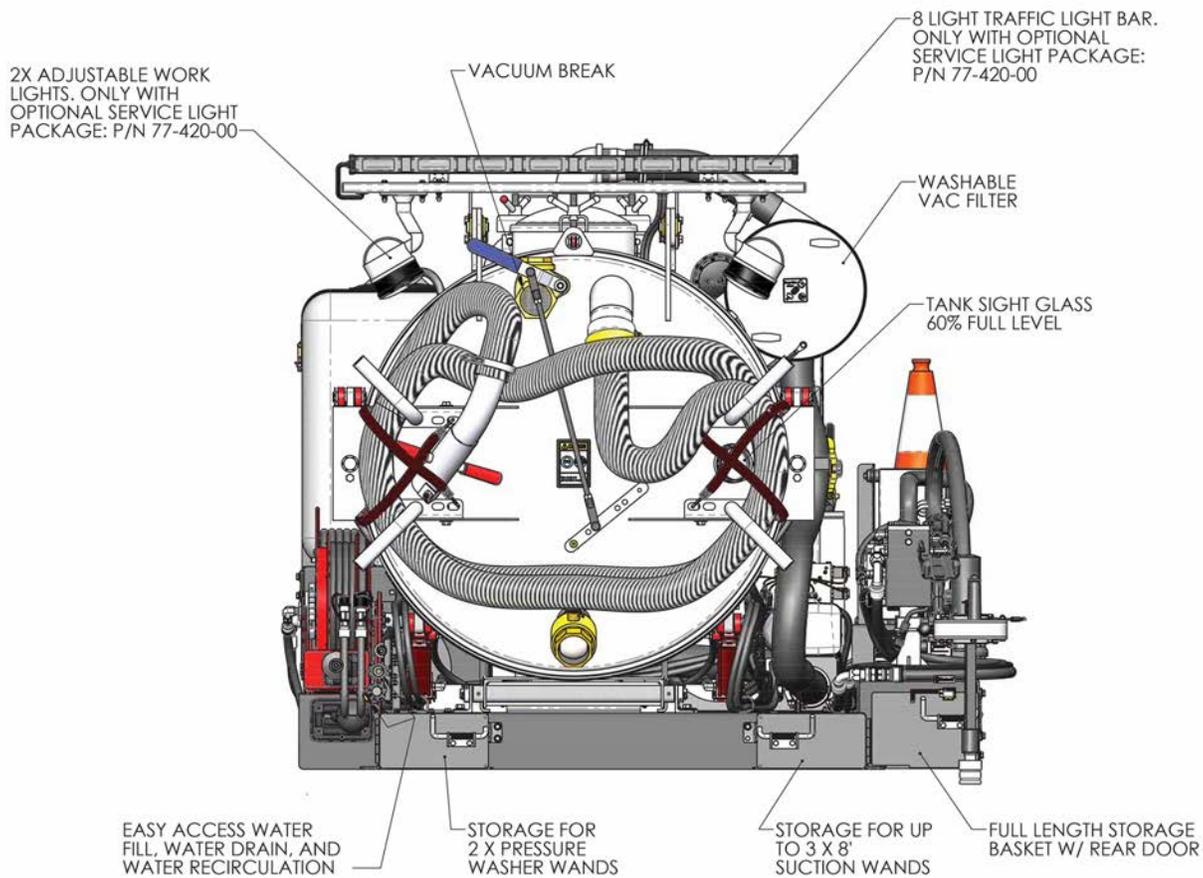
The drawing shows the rear view of the Standard Builder (both diesel and gas configurations).
